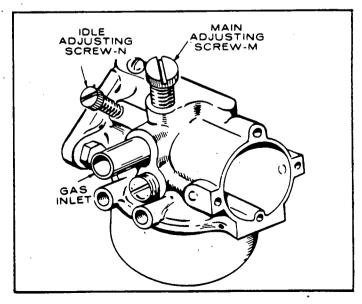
GAS CARBURETOR ADJUSTMENT
